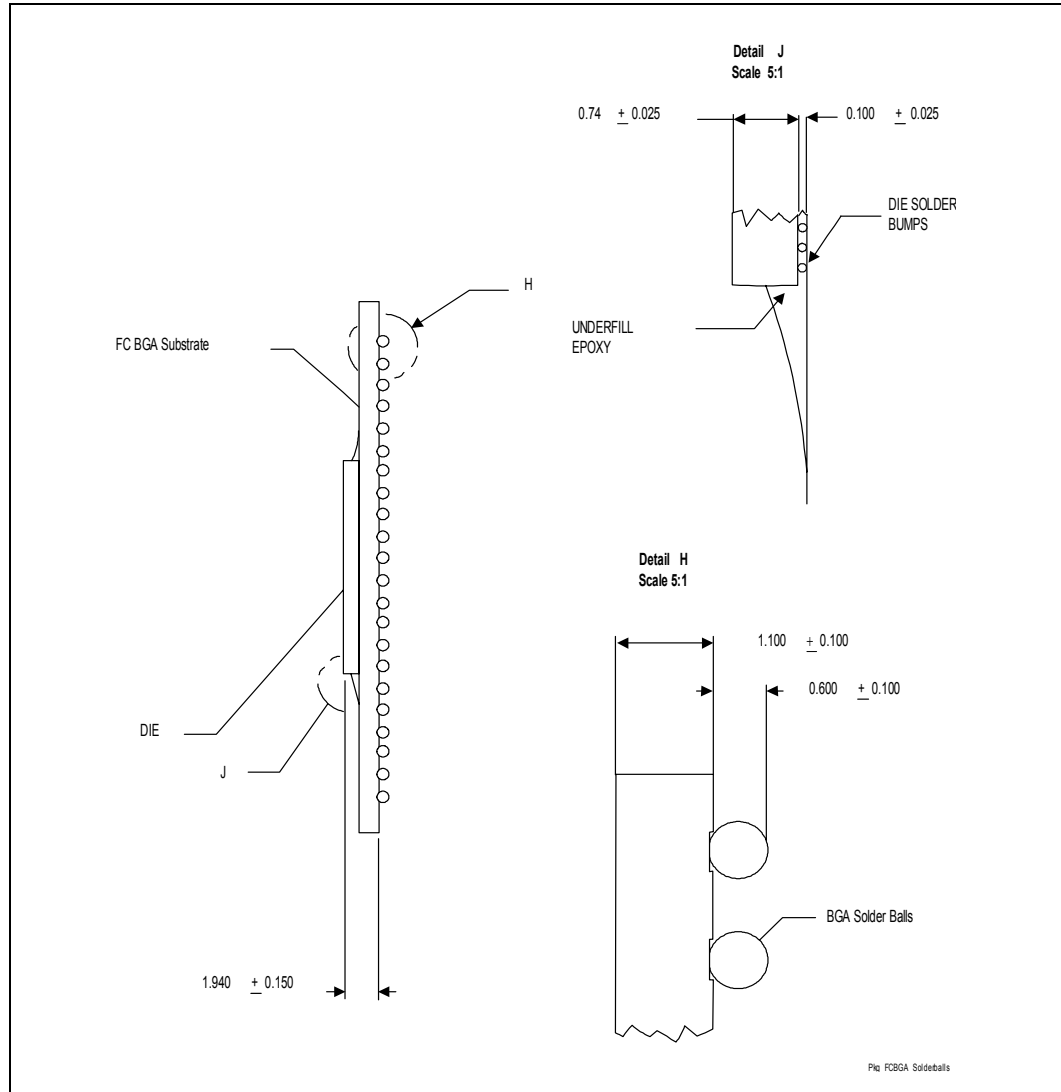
Side View – Intel® 6702PXH 64-bit PCI Hub 567-Ball FCBGA Package Dimensions
